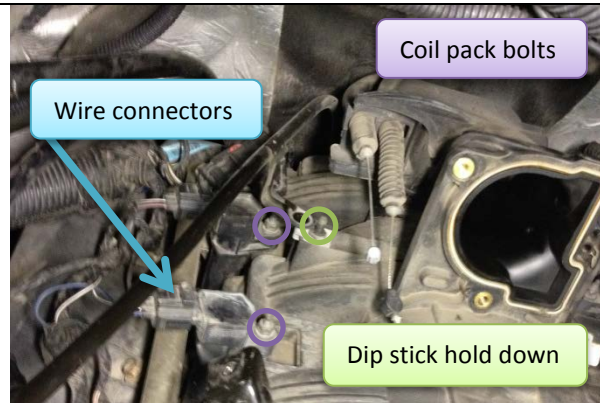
Coil pack bolts, wire connectors and oil dip stick nut.
